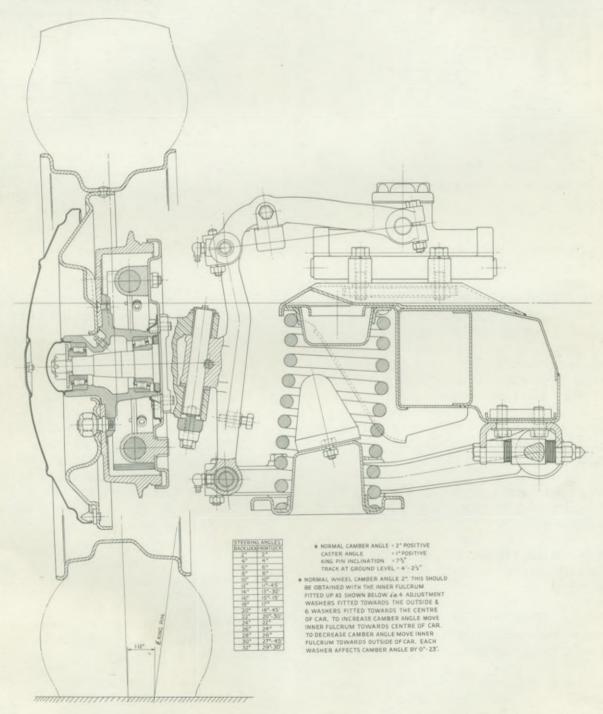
A scrap view of the Front Suspension arrangement drawing showing camber adjustment.
